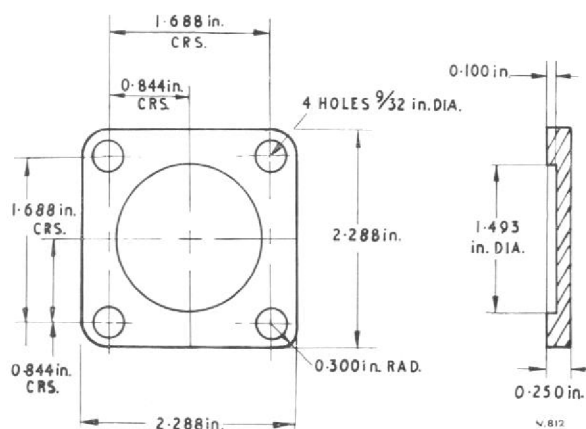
Blanking plate for H.P. filter pipe, and L.P. filter to pump pipe, Ghost 53 Mk. 1.
